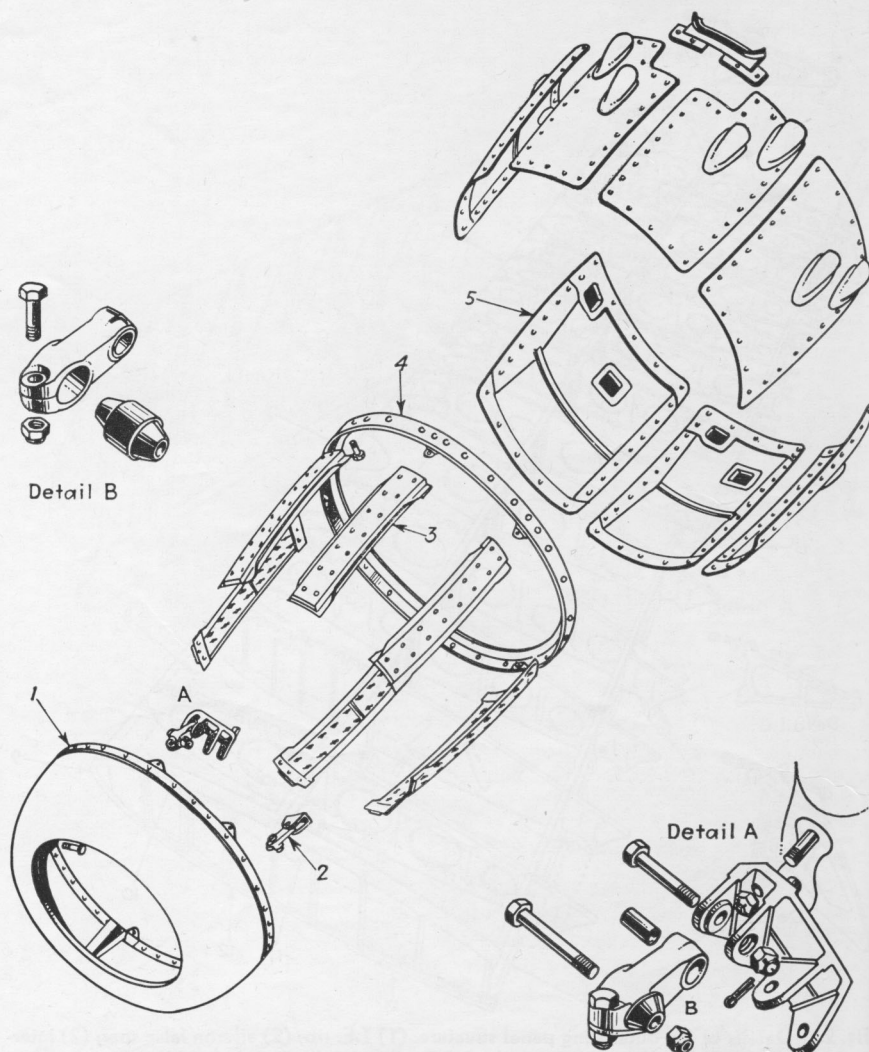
Nose ring and removable cowling: (1) engine nose ring; (2) link, cowling to engine; (3) cowl former; (4) engine flap ring; (5) removable cowl panel.
